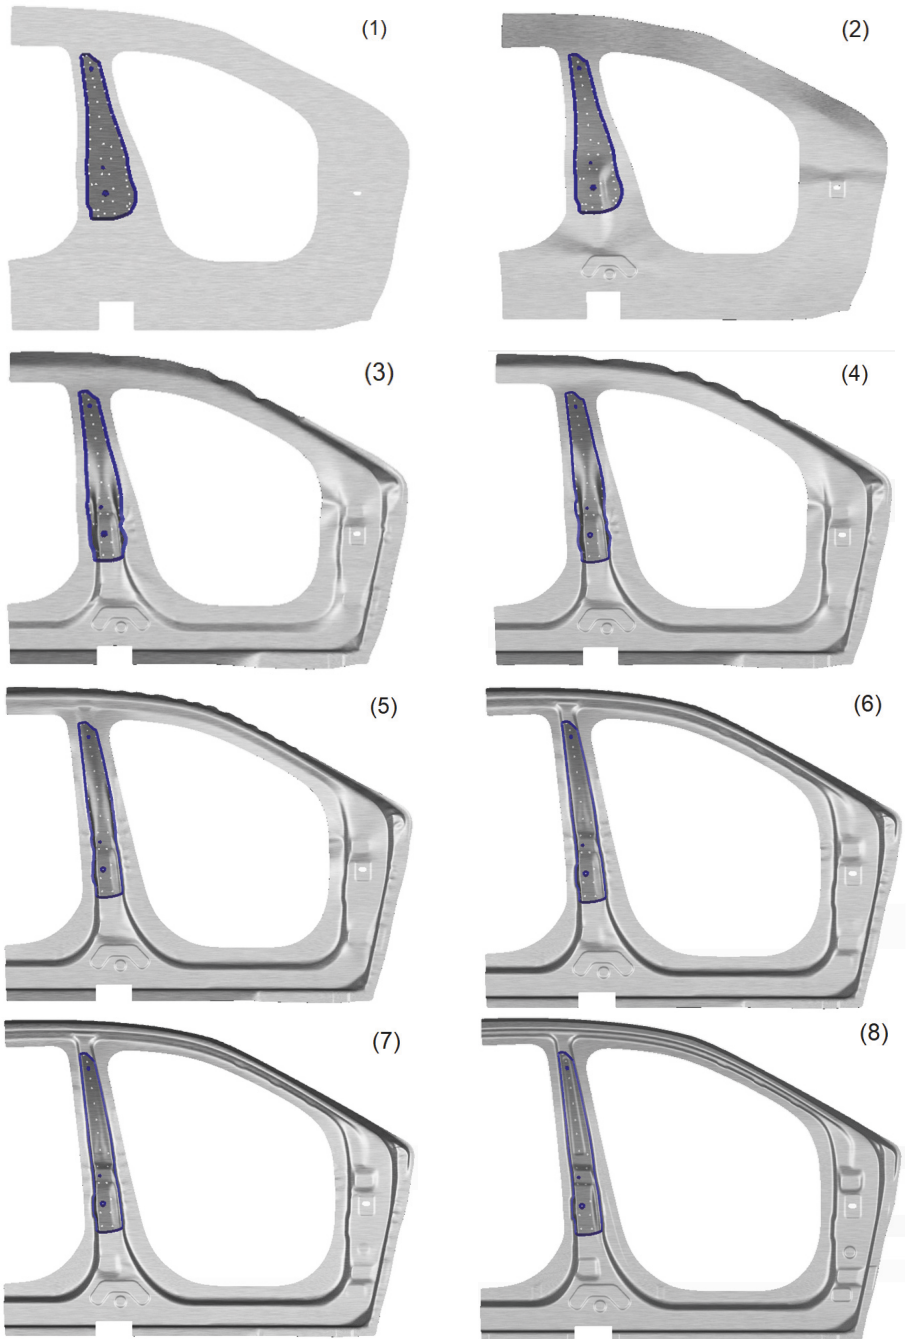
Forming process of door ring with patch board (1-Blank and Patch board; 2- Lower pad closing (or 90mm from bottom); 3- upper pad closing (or 40mm from bottom); 4- 30mm before Bottom; 5- 15mm before Bottom; 6-5mm before Bottom; 7- 3mm before Bottom; 8-Bottom)
